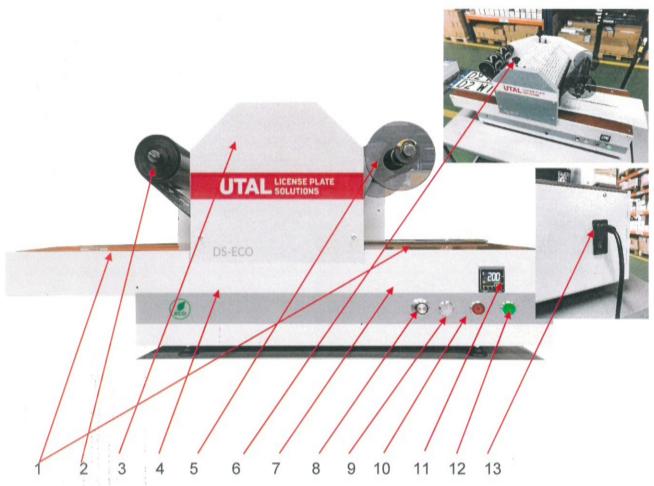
Hot-stamping machine components - (the colours of the machine may differ from those shown in the photo).
